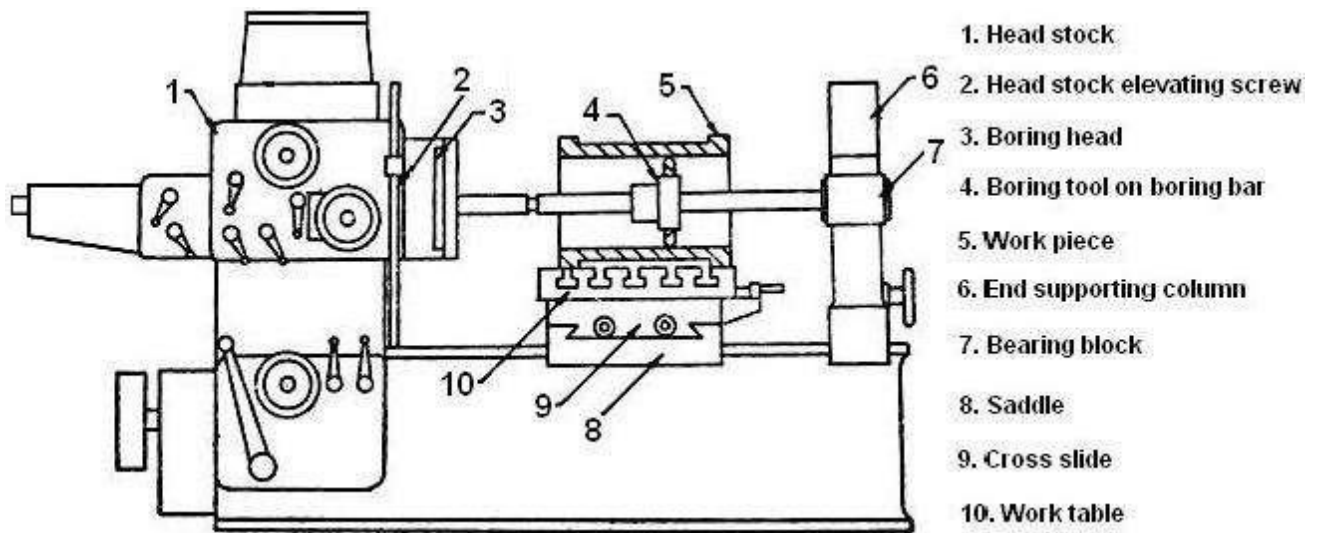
schematically shows the basic configuration of a horizontal boring machine.
